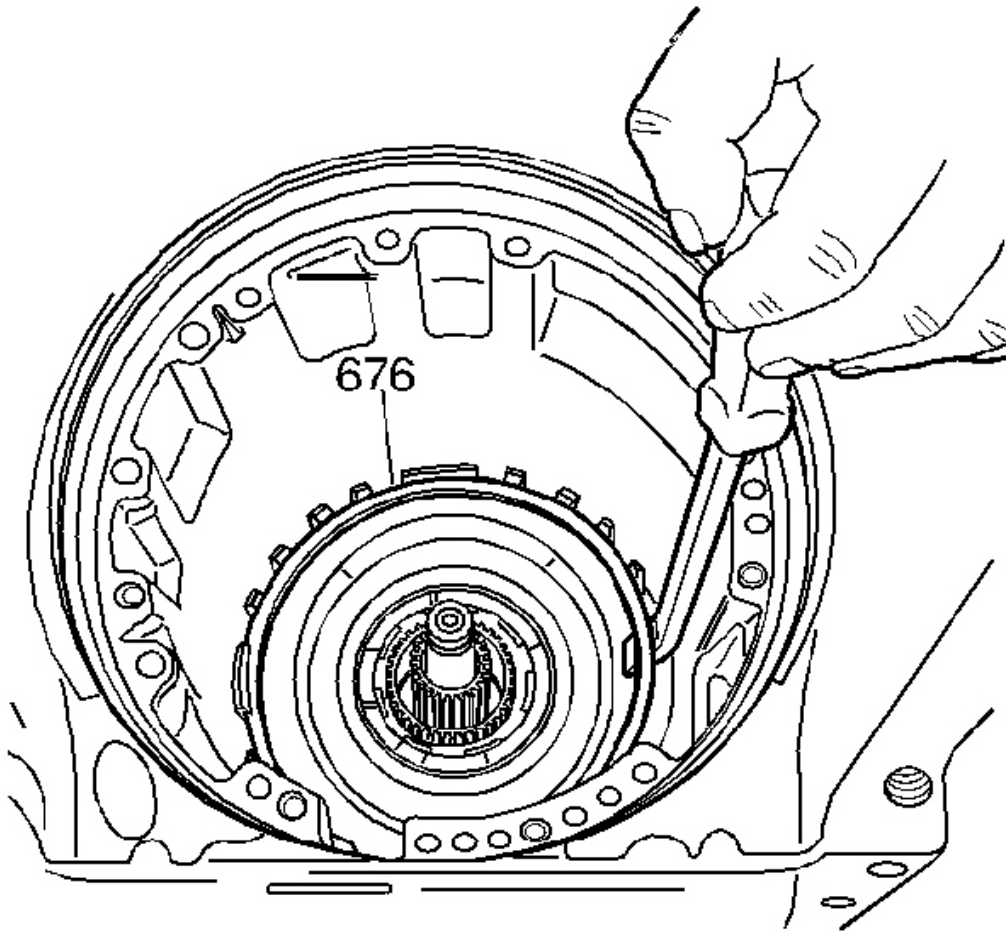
Identifying Low And Reverse Support Retainer Ring
